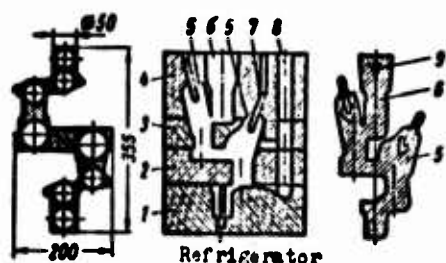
Place of installation of riser on crankshaft: 1-4 - parts of the mold; 5 - closed risers; 6 - open riser; 7 - chuck for gas pressure; 8 - flow gate; 9 - shrinkage cavity.
